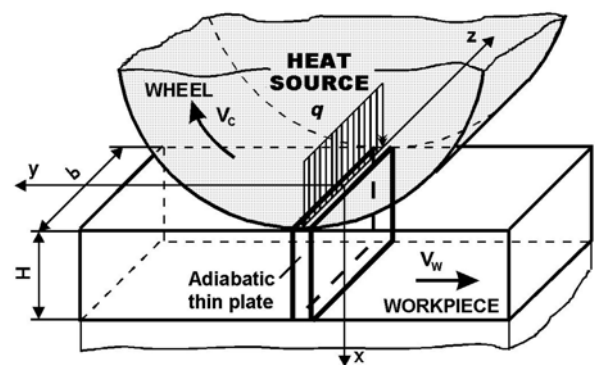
Model of heat transfer in an elementary workpiece part in surface grinding
